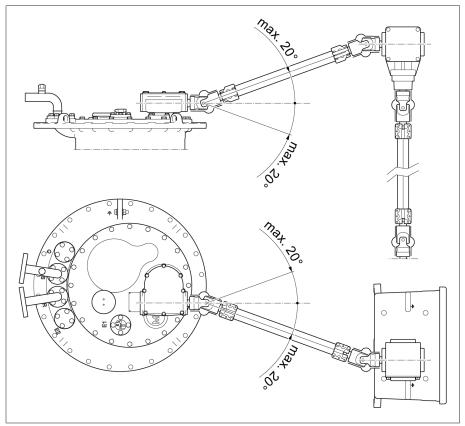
Permitted maximum axial displacement of horizontal drive shaft with cardan joints
